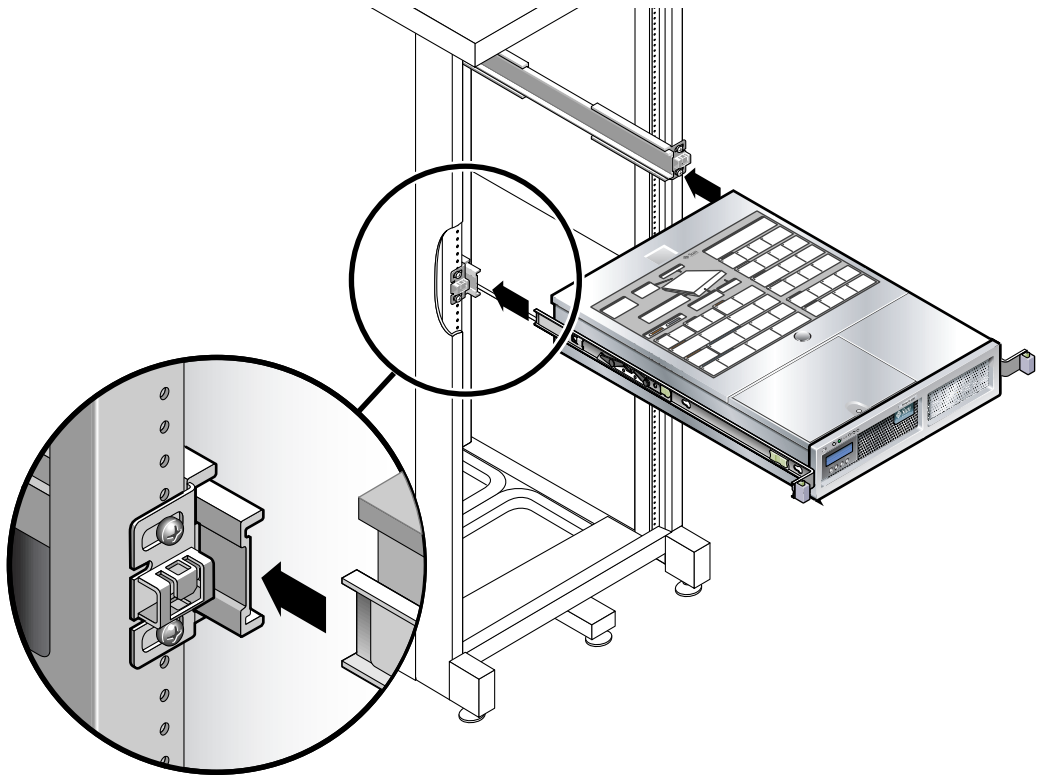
Mounting the Chassis on the Slide Rails
